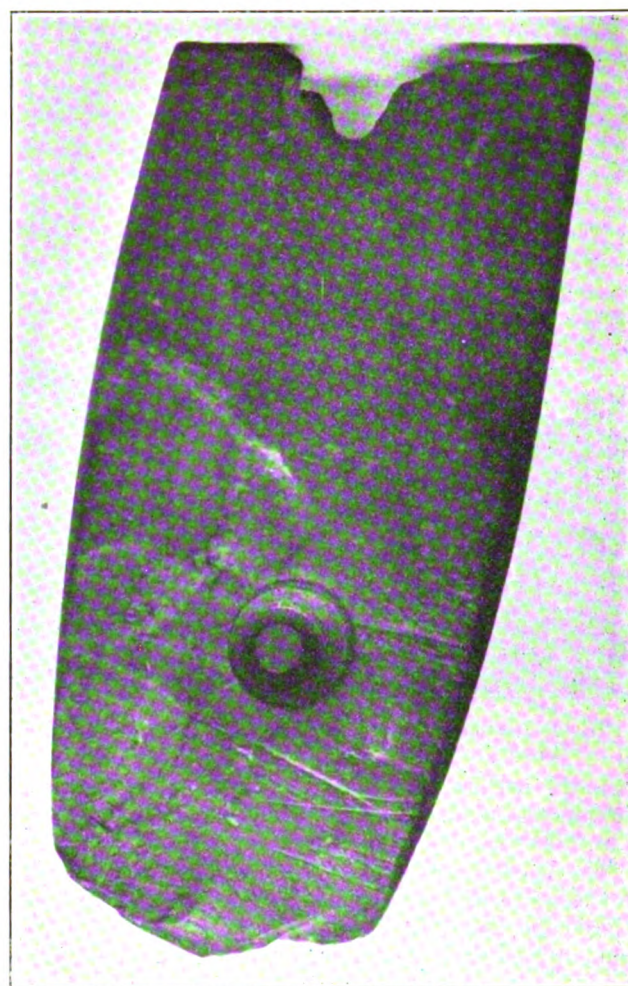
Stone with holes ground in center, probably used by very primitive wire drawers.
